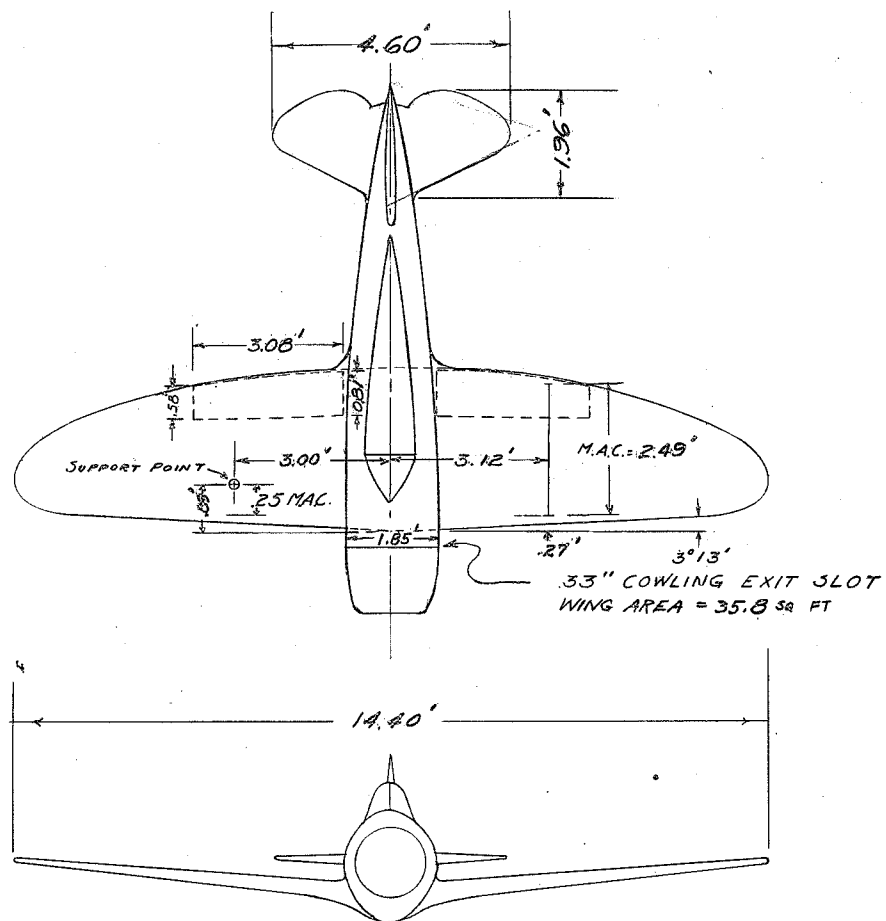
PLAN AND ELEVATIONS OF 0.4-SCALE MODEL OF THE BASIC PURSUIT AIRPLANE.
